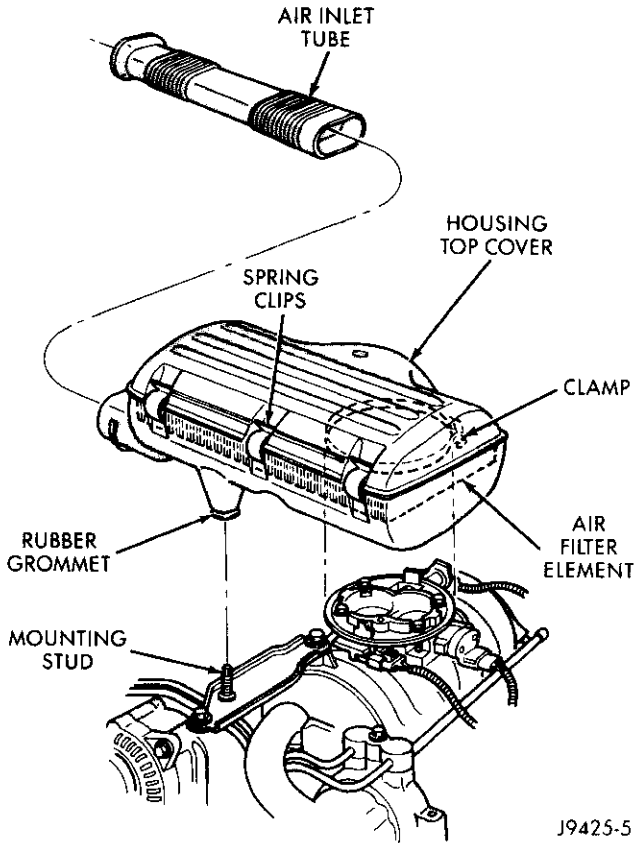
Air Cleaner Housing—3.9L/5.2L/5.9L Engines
